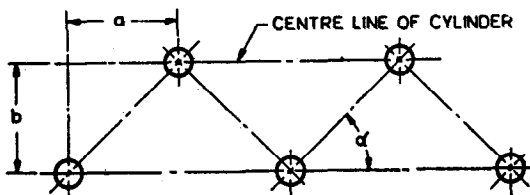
C REGULAR SAW TOOTH PATTERN OF HOLES
